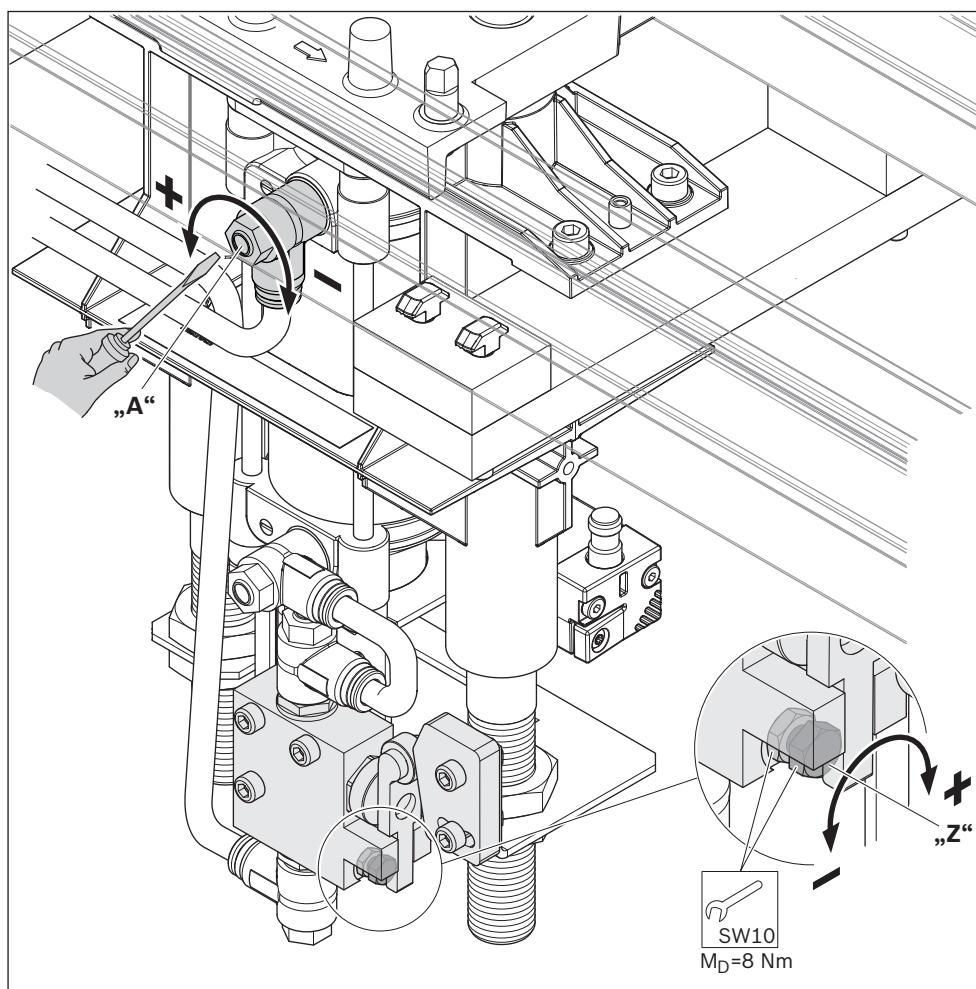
Setting the lifting speed (with kit for lower end damping)
